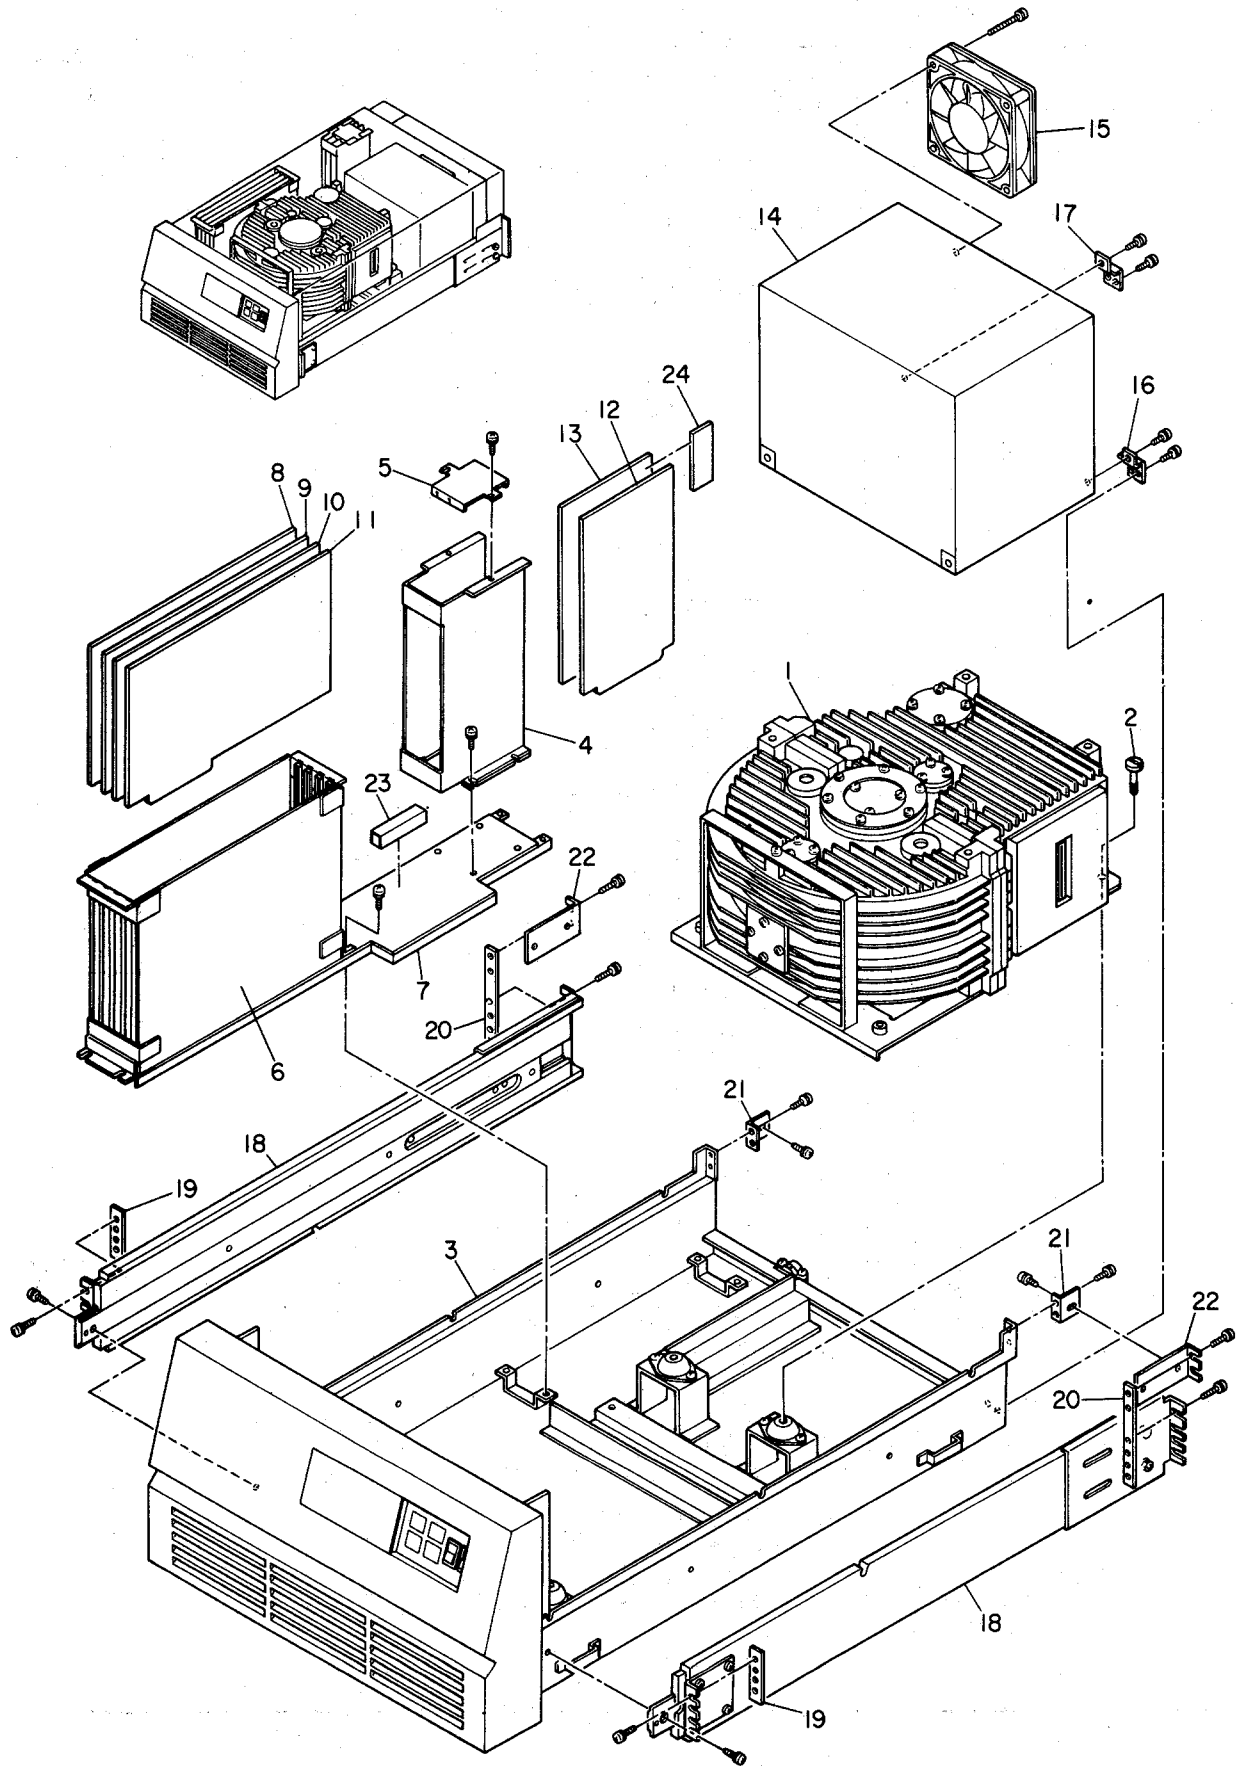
DE, CARD CAGE & POWER SUPPLY
